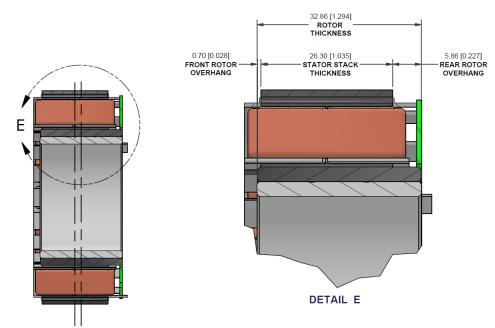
Detail view of Typical Rotor to Stator Alignment on Hall-sensor Motor version
